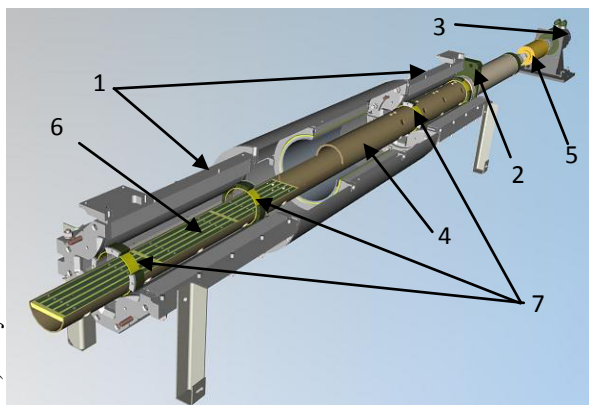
3D model of the probe installed in the magnet: 1 - Quadrupoles doublet, 2 -Thrusting bearing, 3- Servomotor, 4-Tubular fiberglass frame, 5 - Slip rings, 6-PCB, 7 - Bearings.
